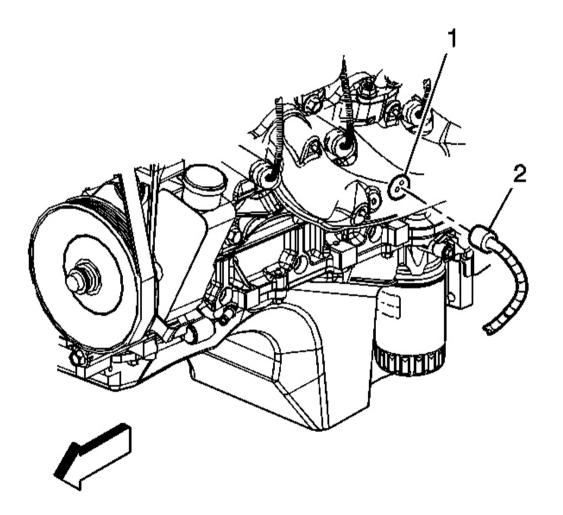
Engine Coolant Heater Cord Electrical Connector & Coolant Heater Courtesy of GENERAL MOTORS CORP.
